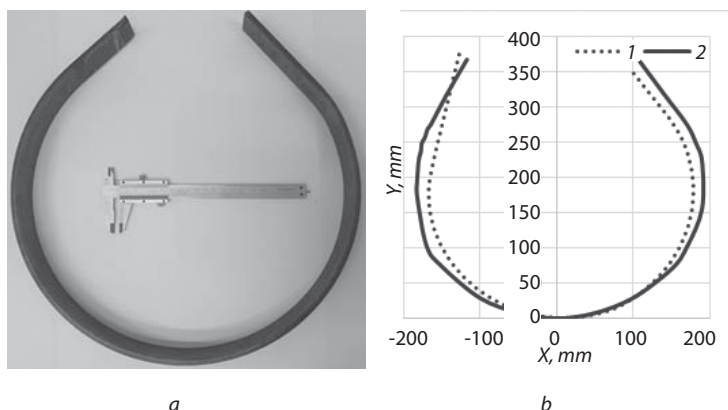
Photograph of the formed tube billet (a) and inner contour of the tube billet (b):
